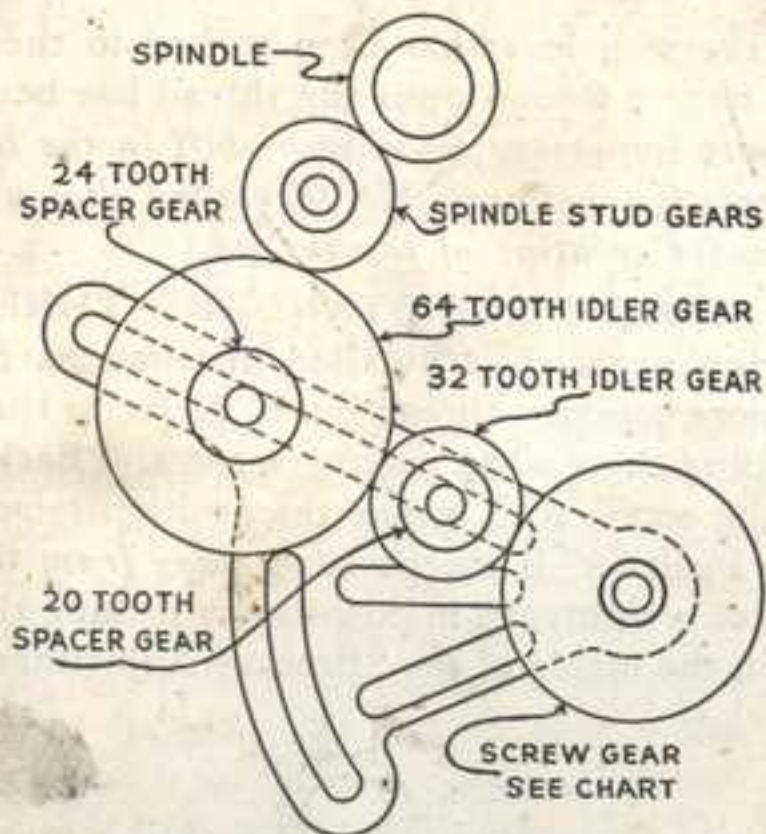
Gear set-up for 8 through 16 threads per inch.
